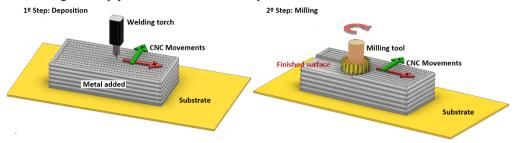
Steps in the hybrid process of metal additive manufacturing combining 3D welding-based process and milling.
